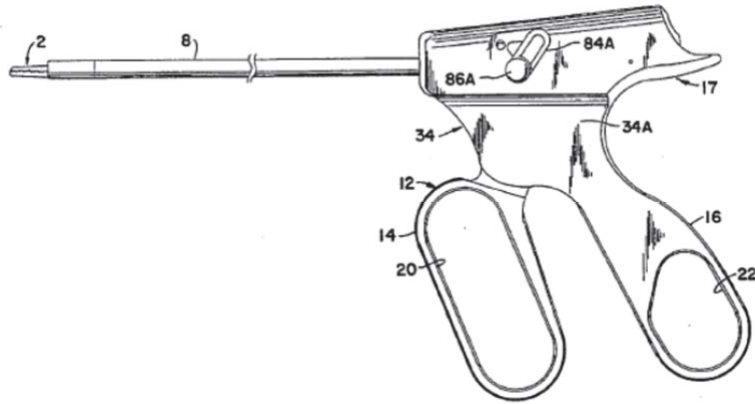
shows a side view of a preferred embodiment that includes unitary jaw piece 2, outer hollow shaft 8, and handle assembly 12 including stationary handle member 16 and movable handle member 14. *Id.* at 6:13–22.
